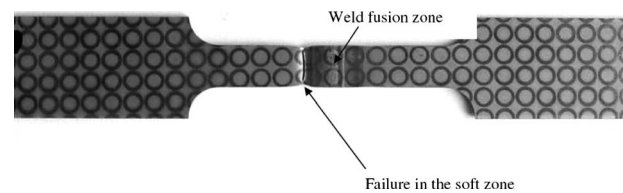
Localized failure in the softened zone during tensile testing of transverse welded specimens (diode laser weld)
